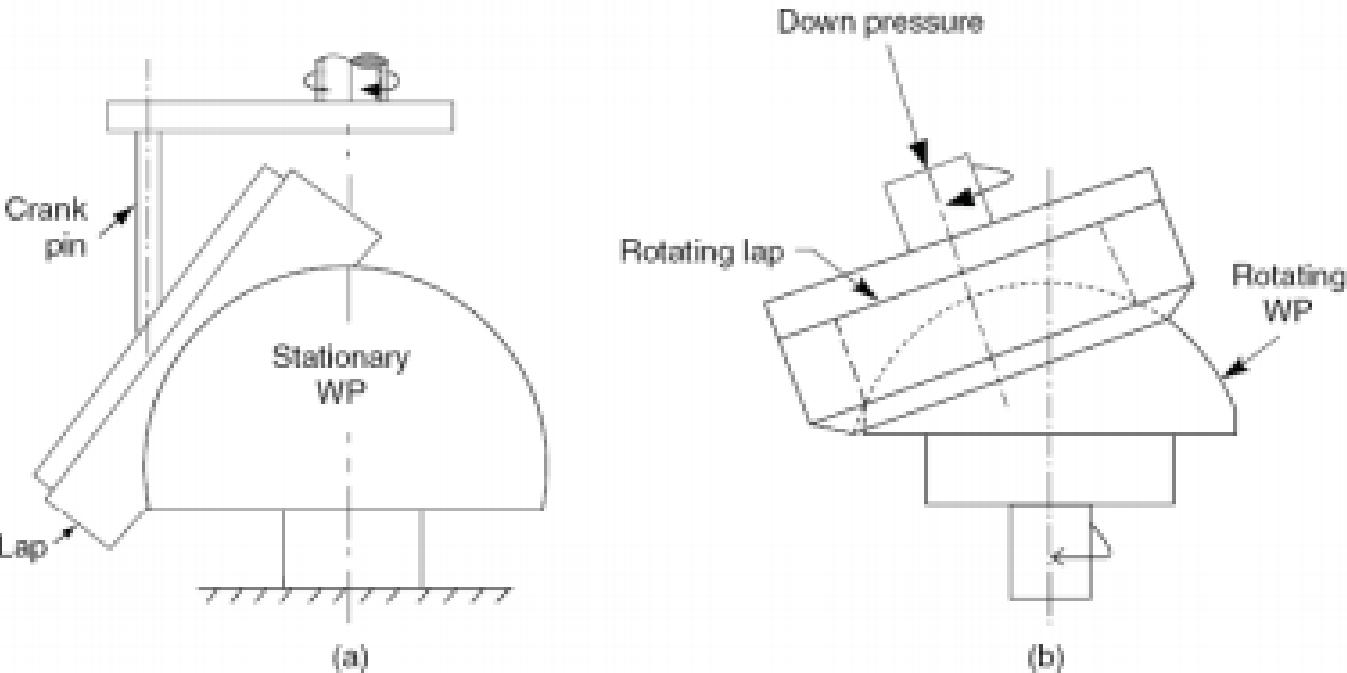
Lapping of spherical surfaces: (a) single-spindle machine and (b) two-spindle machine.
